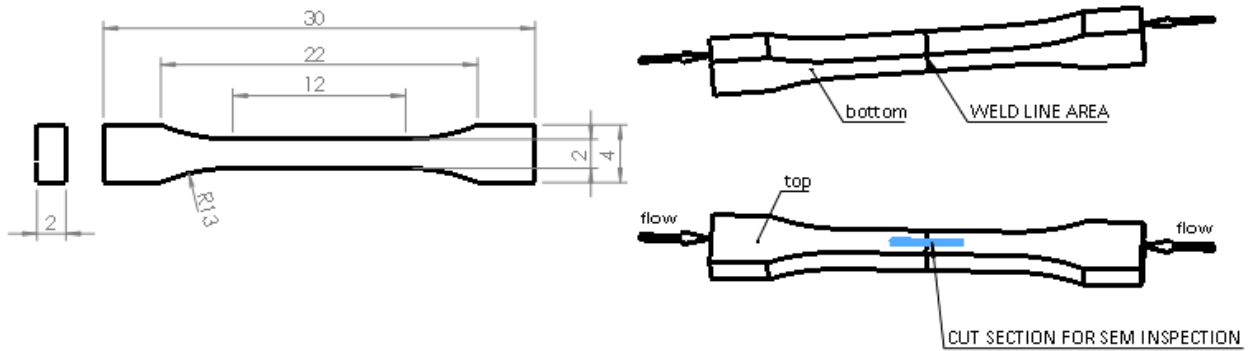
Dimensions of manufactured specimen (unit: mm) and scheme of SEM areas of weld line
